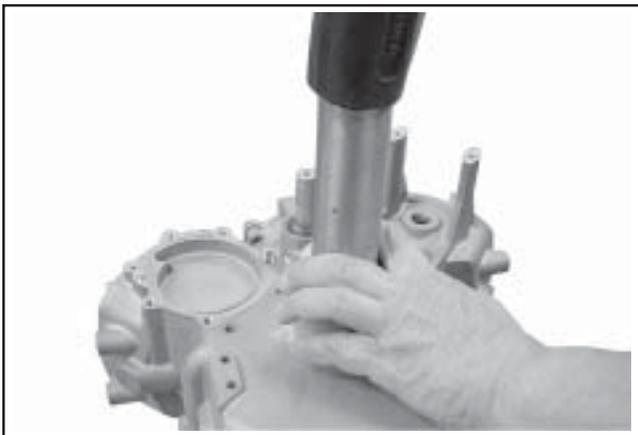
Installing Crankshaft PTO Side Seal Using Tool.
